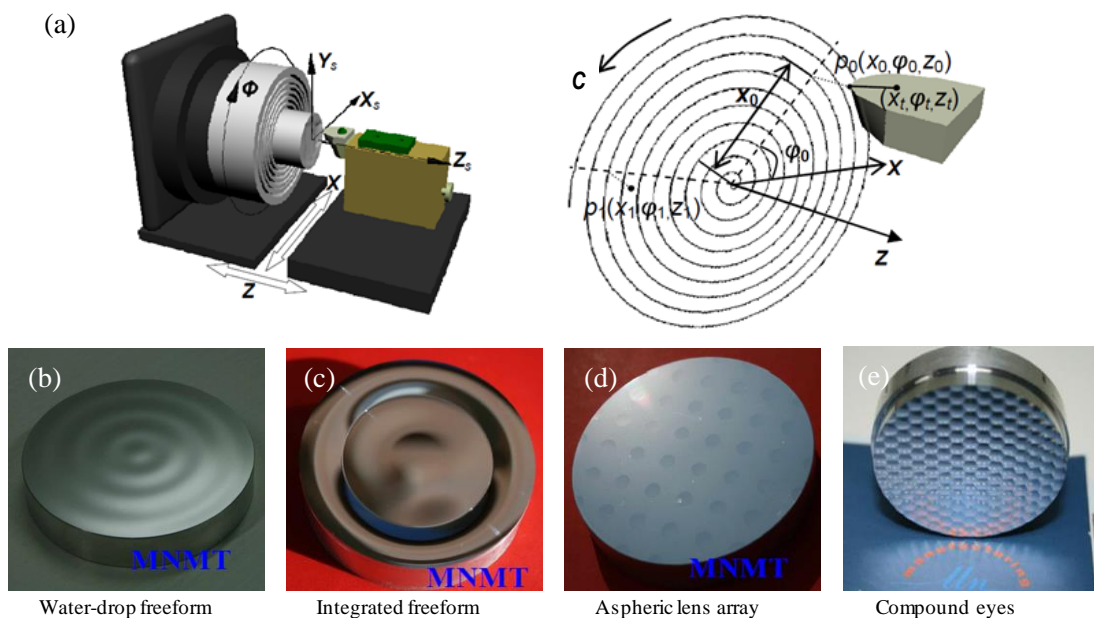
STS machining freeform surfaces and structured optics. (a) Cylindrical coordinate machining method; and (b)-(e) are typical freeform surfaces produced by STS diamond machining [59, 64].
